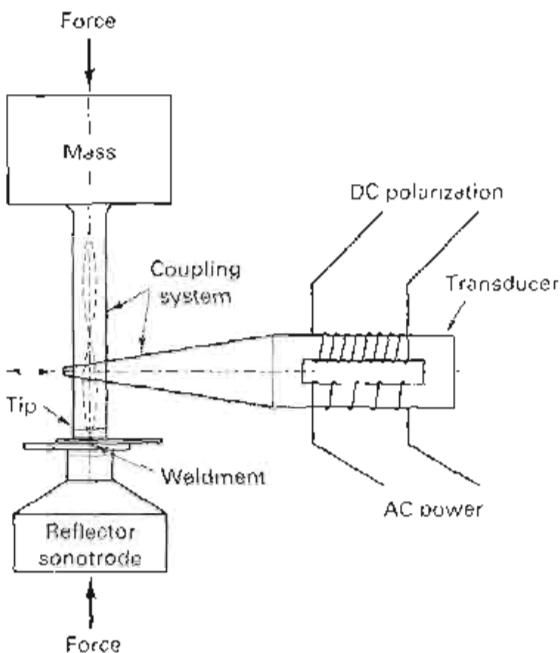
Diagram of the equipment used in ultrasonic welding.
